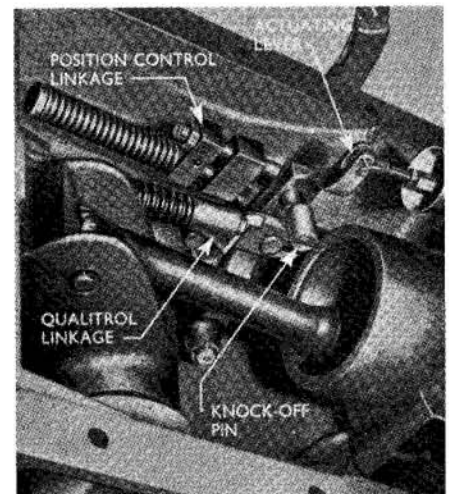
View of model "New FSM" control linkage showing knock-off pin.
